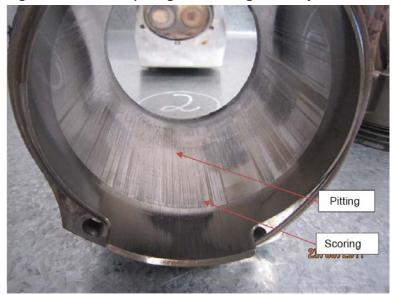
Corrosion pitting and scoring within cylinder two.
